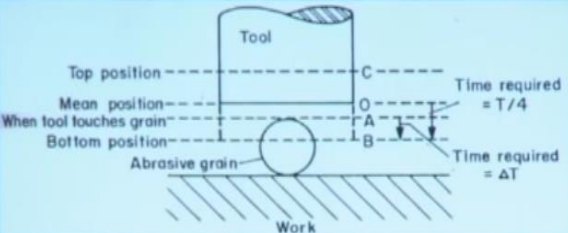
(b): Various positions of the tool while hitting workpiece via a grit
